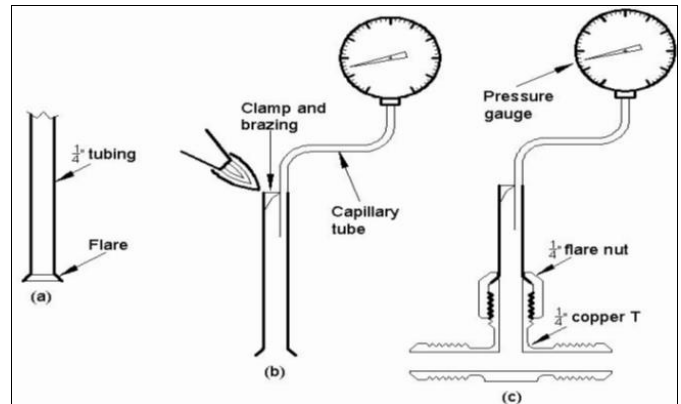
Assembly method of pressure measurement using Bourdon type pressure
